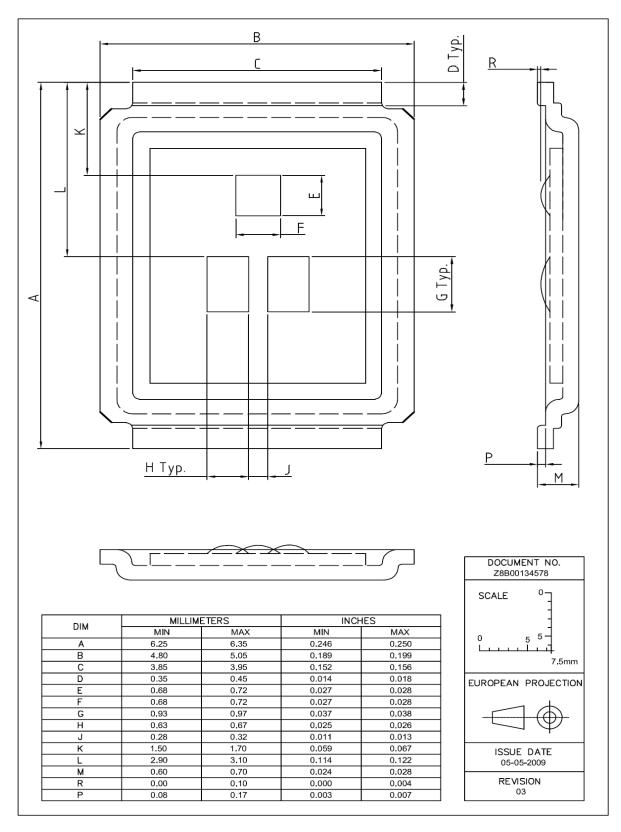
Outlines MG-WDSON-2, dimensions in mm/inches
